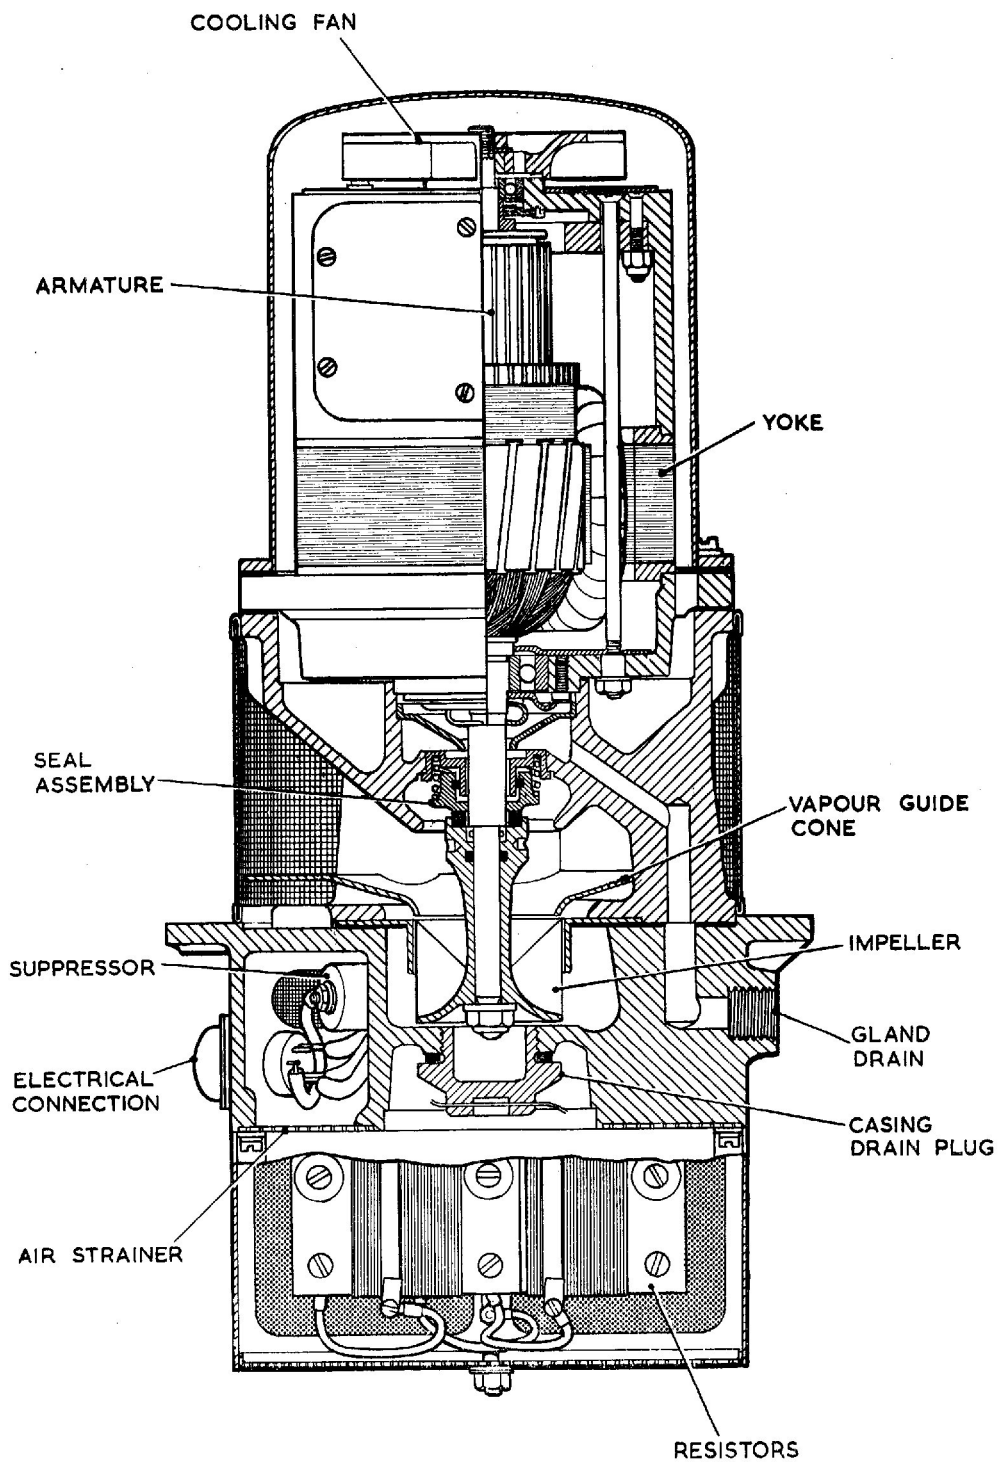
Sectional view of P.D.C.909 Mk X fuel pump
